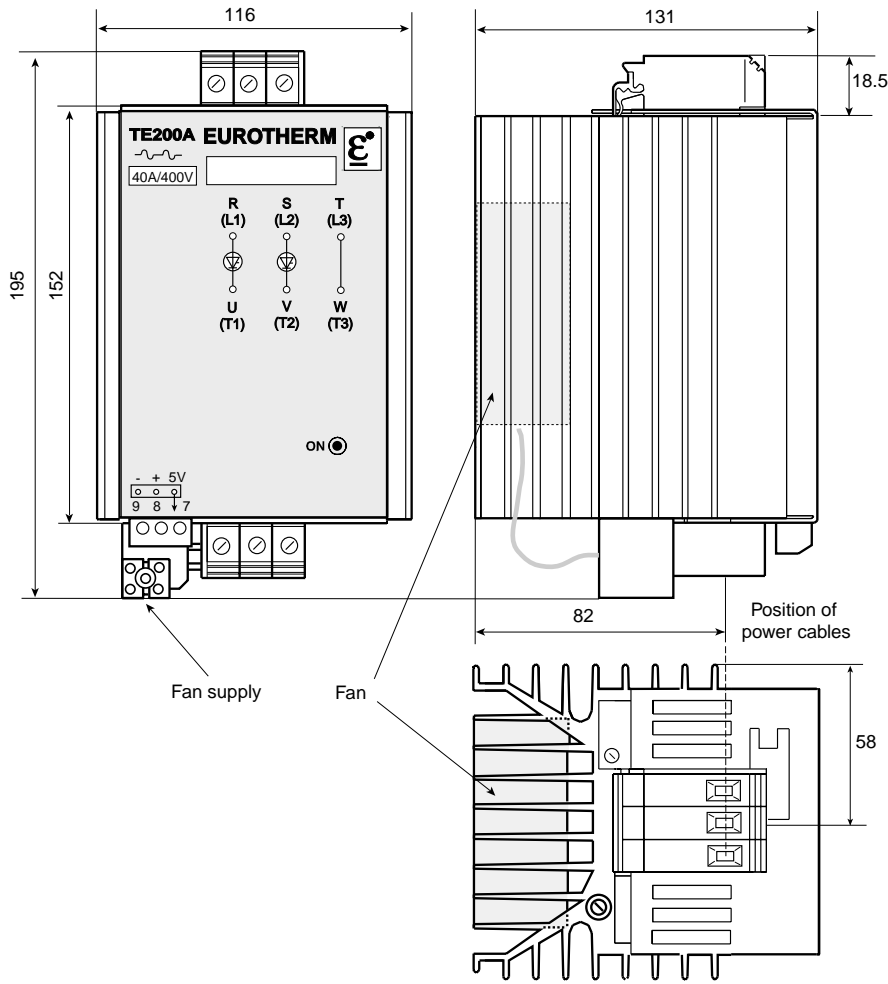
Dimensions (mm) of fan-cooled TE200A controller (63A rated unit)
